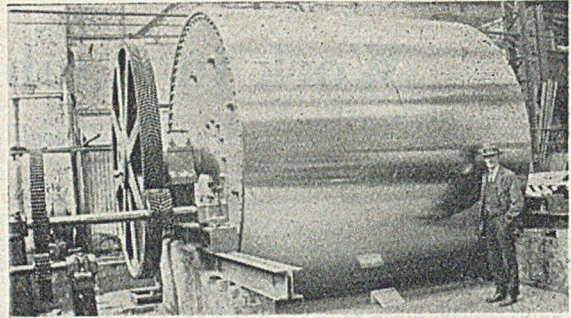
“MIRROR” FINISH ON THE PAPER ROLL.
